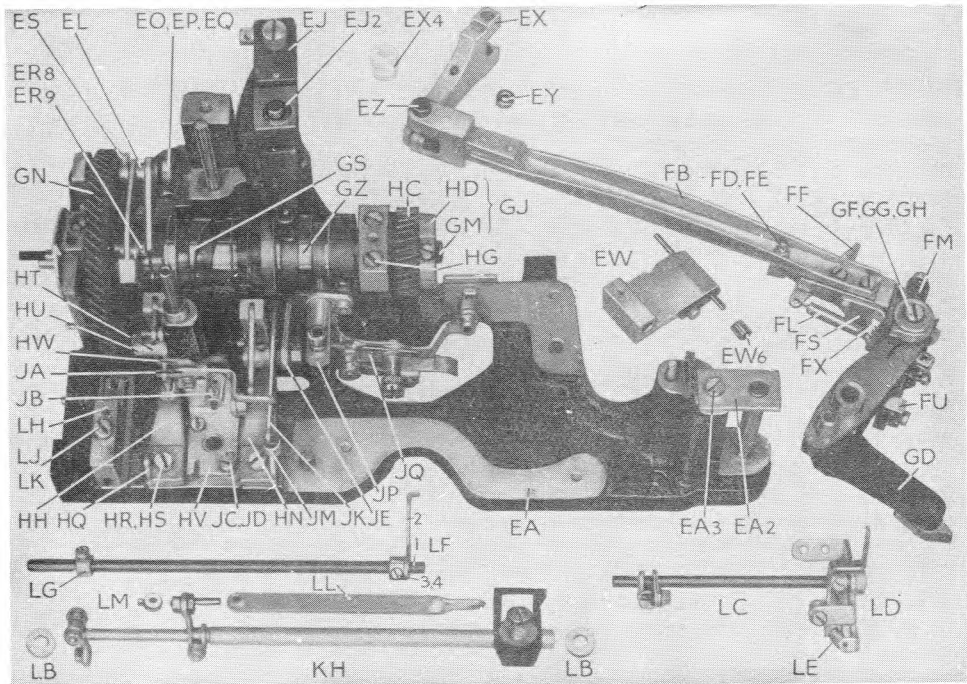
CAM UNIT PARTIAL ASSEMBLY.
